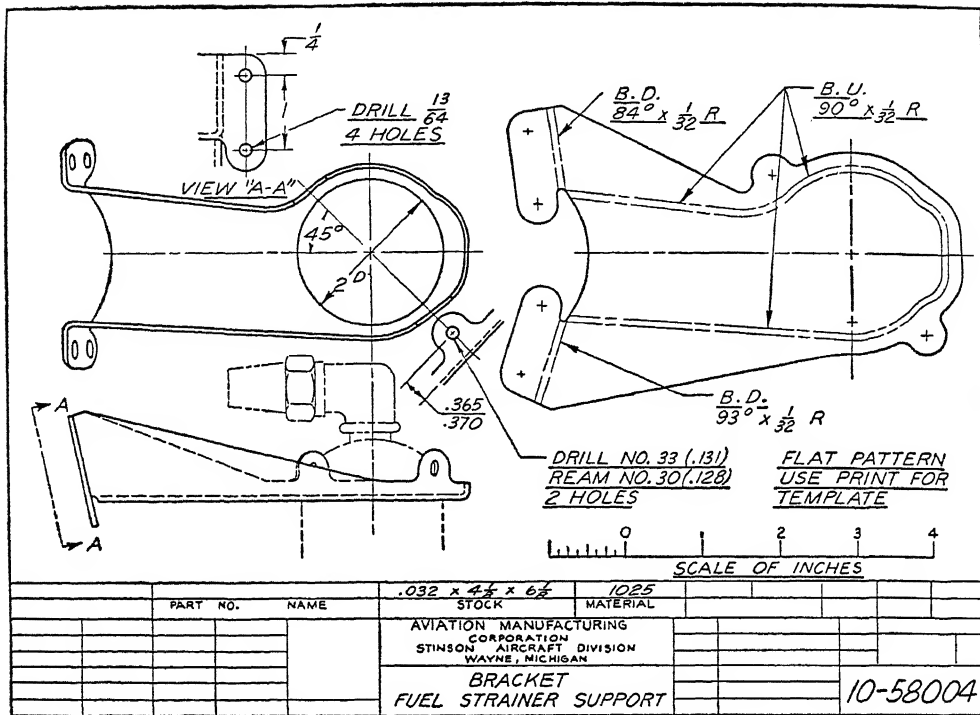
Drawing with Flat Pattern. Prob. 13-49.
